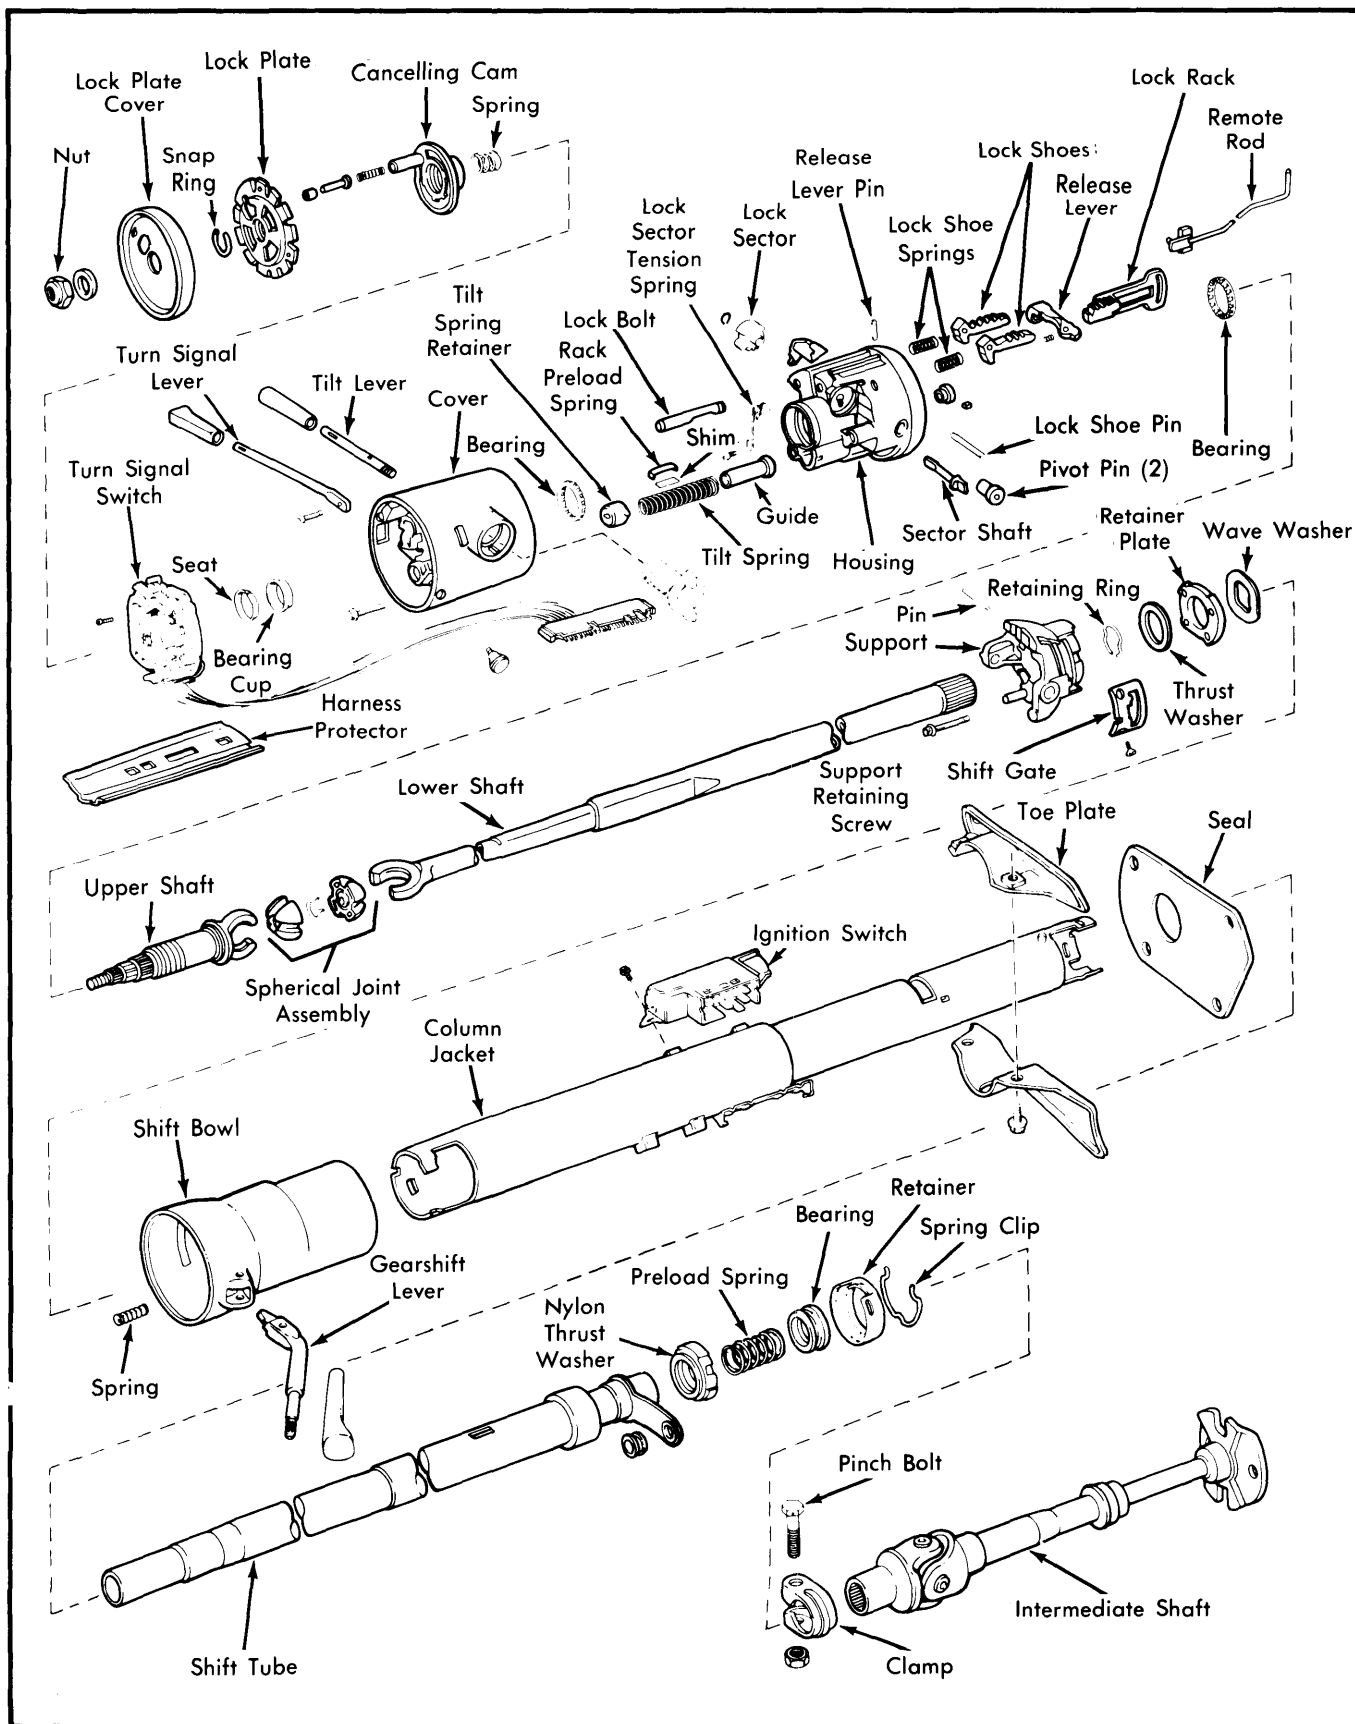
Exploded View of Tilt Wheel Steering Column (All Except "CJ" & Scrambler Models)
